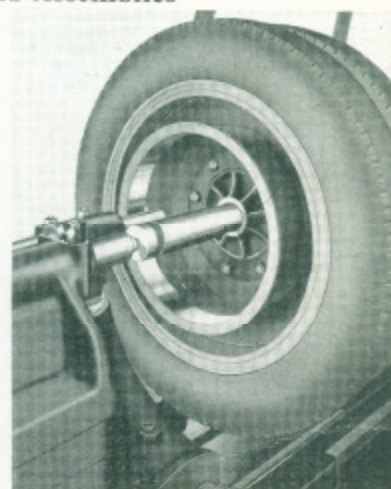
Truing the brake drum of a rear dual wheel of a truck mounted on a taper mandrel between centers on the lathe.
